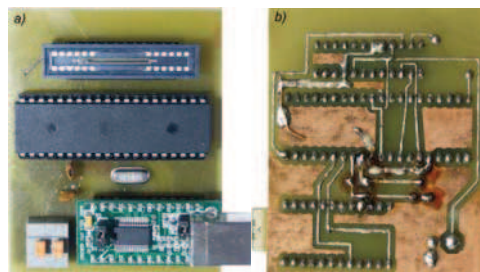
Realization of camera (a) Front view, b) Bottom view.
